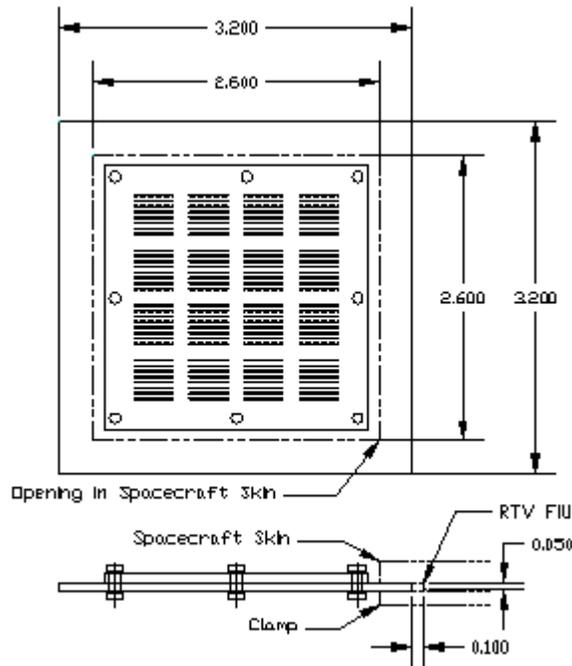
MESA mechanical drawings, top and side views. Units are in inches.
